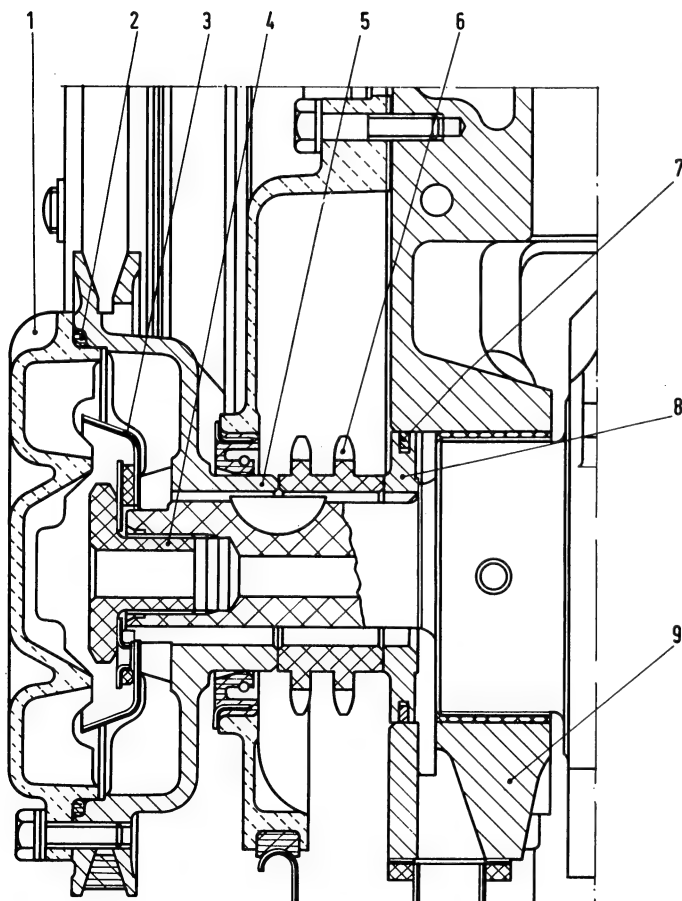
Detail of 115 C.005 engine side section view across centrifugal oil filter.
